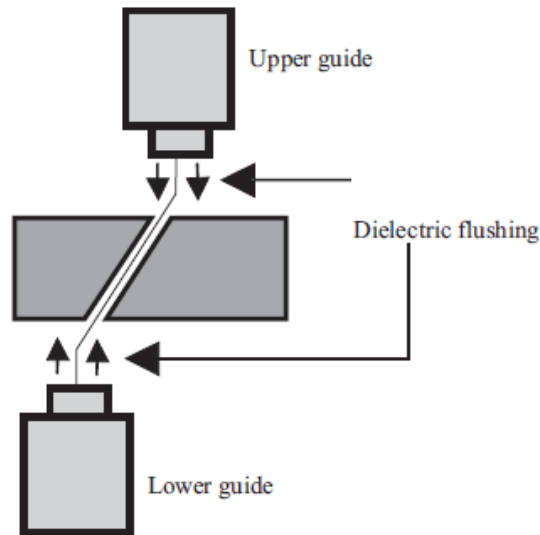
Relative displacement of upper and lower guides in WEDM taper-cutting [25].
